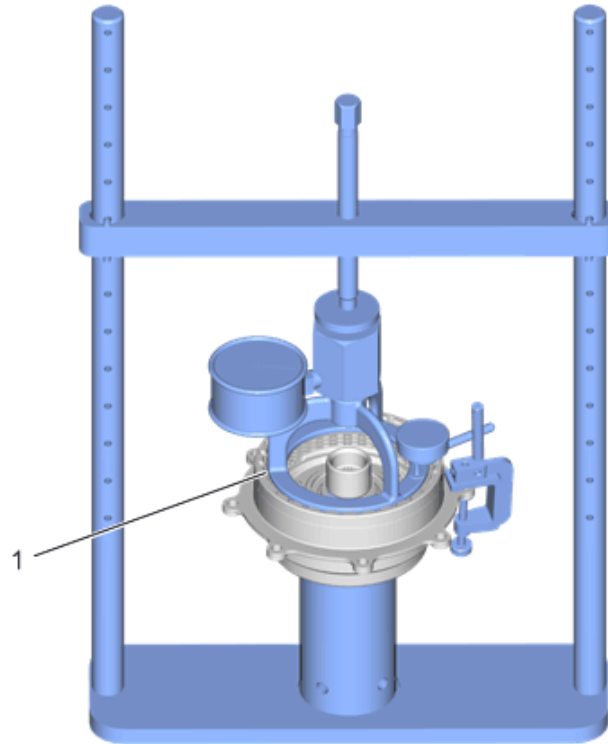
Variable High Clutch Backing Plate Retaining Ring Measurement
